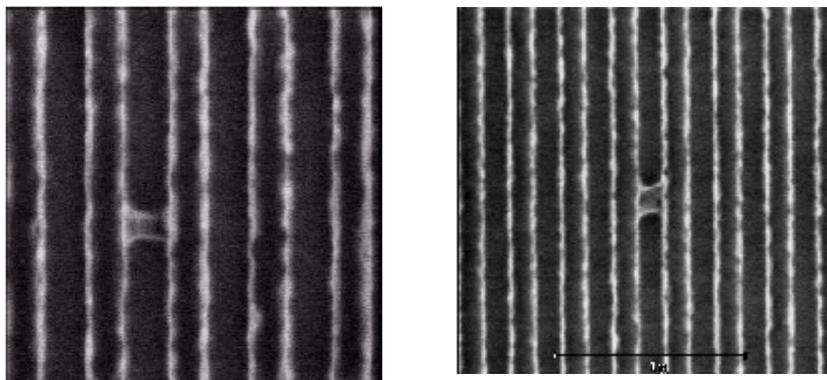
Typical trench bridging defect<sup>1</sup>
